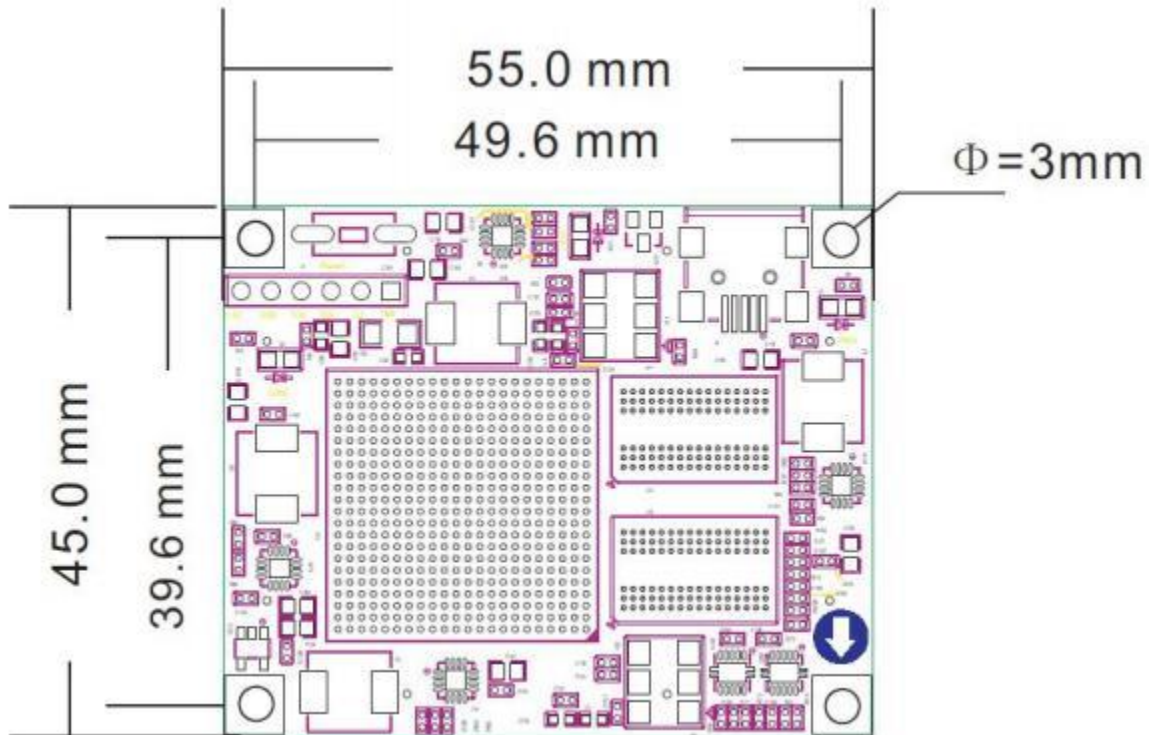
AC7050B FPGA Core board (Top view)
